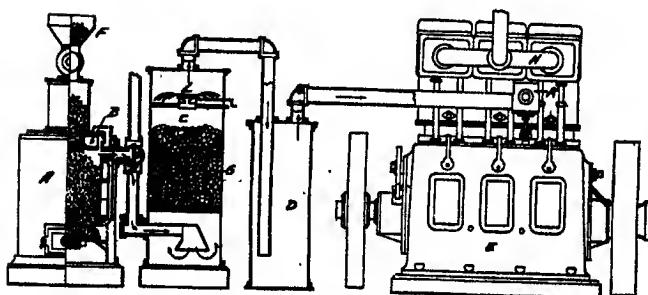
Sectional Elevation of Suction Gas Producer and Gas Engine.
